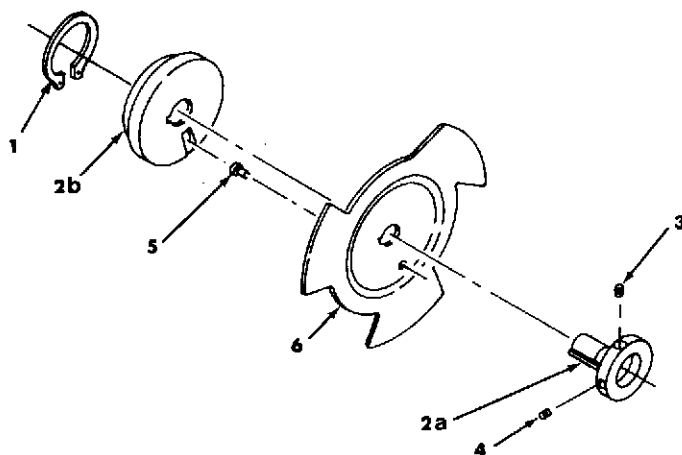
SHUTTER AND CAM ASSEMBLY
